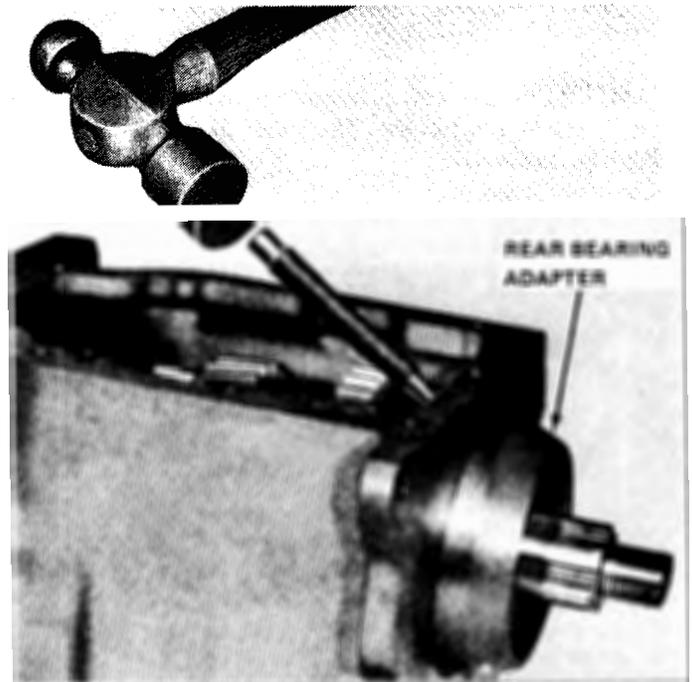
Removing Rear Bearing And Adapter Assembly
